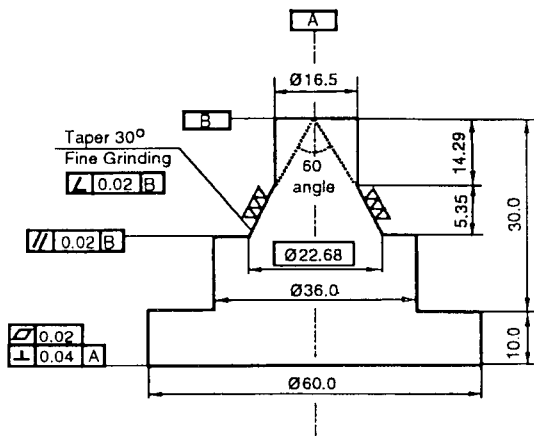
Schematic Diagram of Jig for Flare Test of Tubes.
